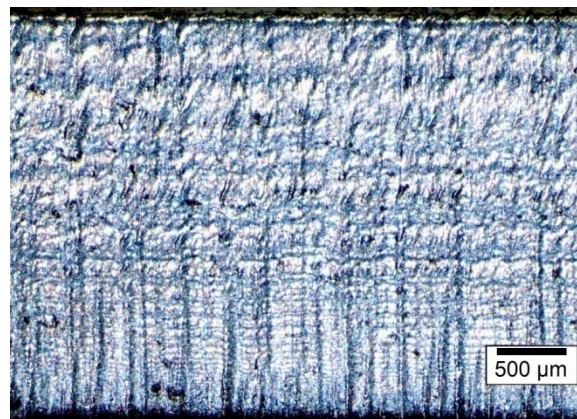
View of PA6 aluminum alloy cut edge - 3,0 mm thick. CO₂ laser, working gas: N₂, working gas pressure: $p=14$ bar, power: $P=5000$ W, cutting speed $v=2,5$ m/min
